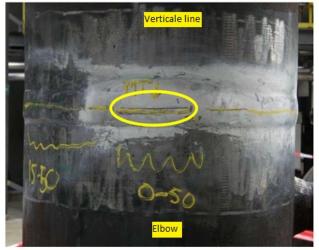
Connection pipe showing the location of cracking at the weld
